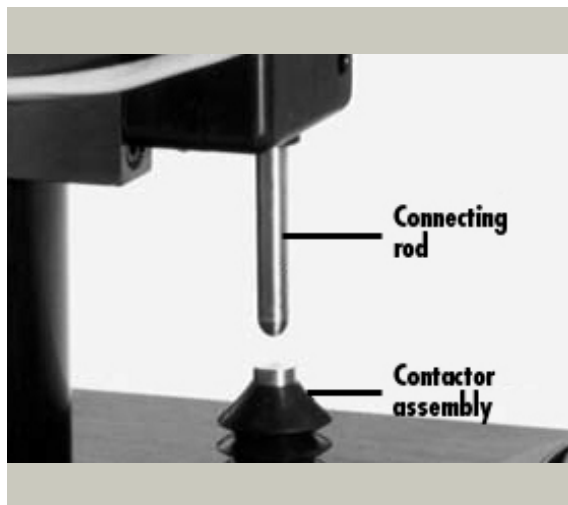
Add the 10.54 mm extender to the indicator contactor assembly.
